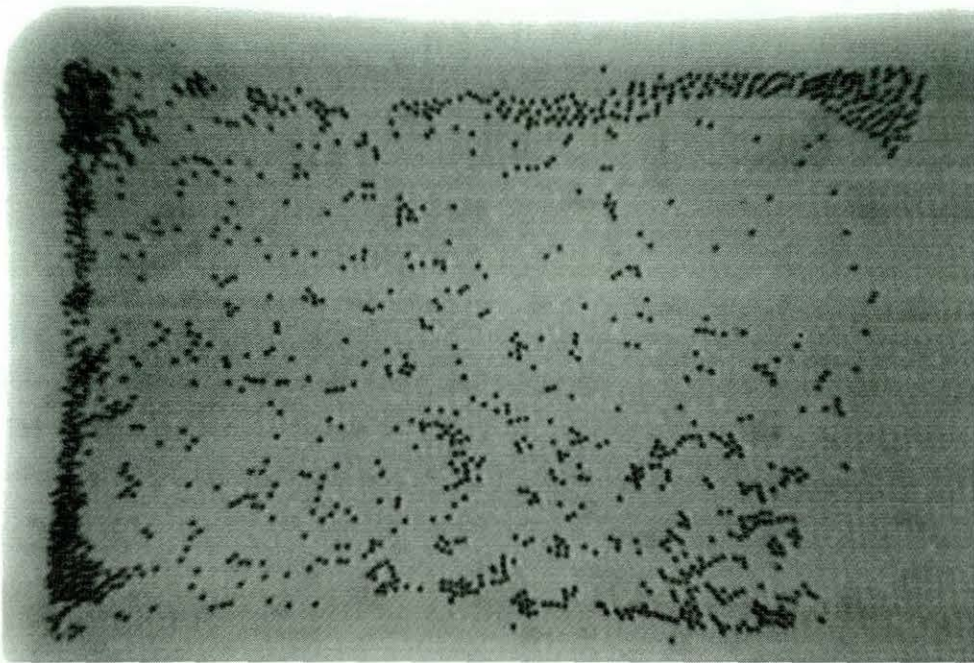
Radioscopic Image of Moulded Plaster of Paris Sample with Ball Bearings.
